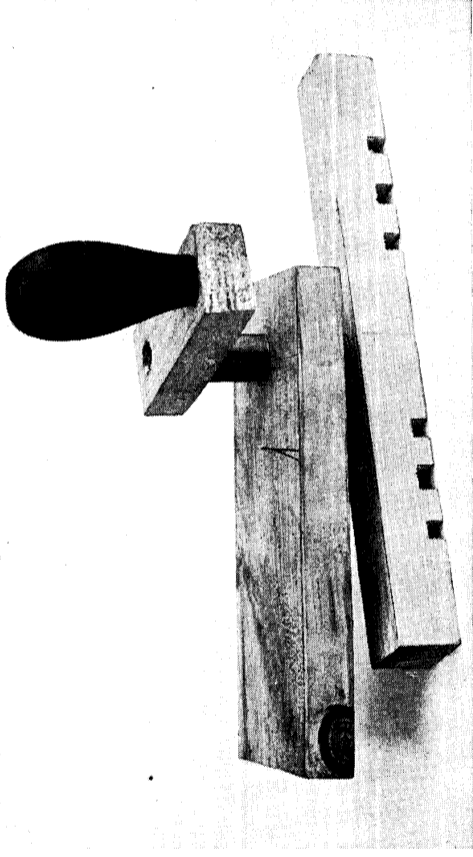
Details of the head stock of the coil winder seen in Fig. 16, showing simplicity of construction
